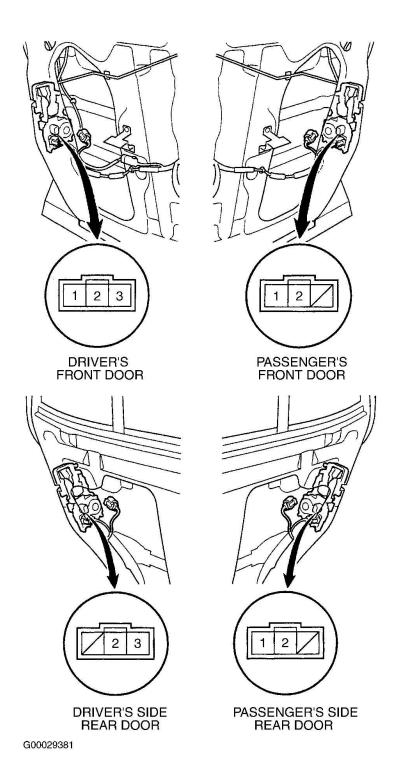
Identifying Door Lock Knob Switch Terminals Courtesy of AMERICAN HONDA MOTOR CO., INC.
